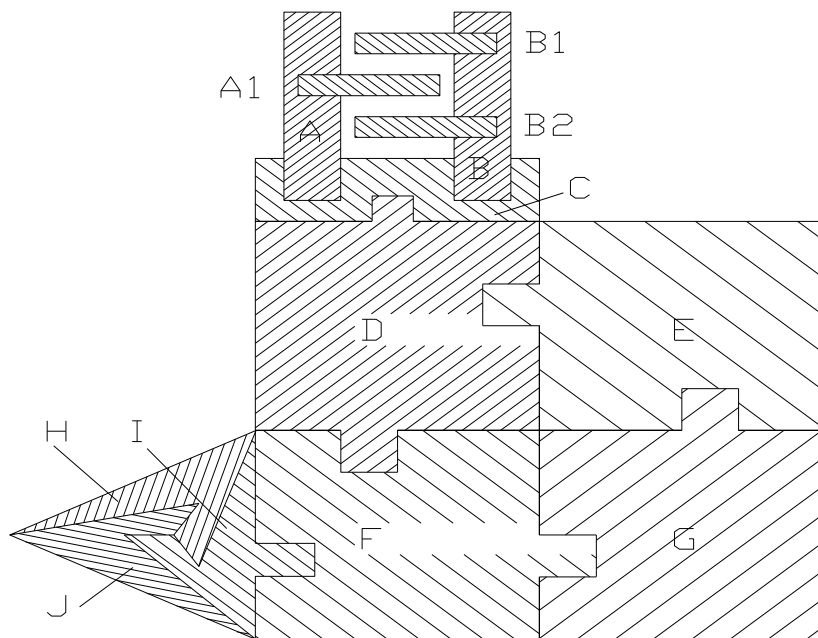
A product that can be assembled with a NC-NS-NL-M assembly
